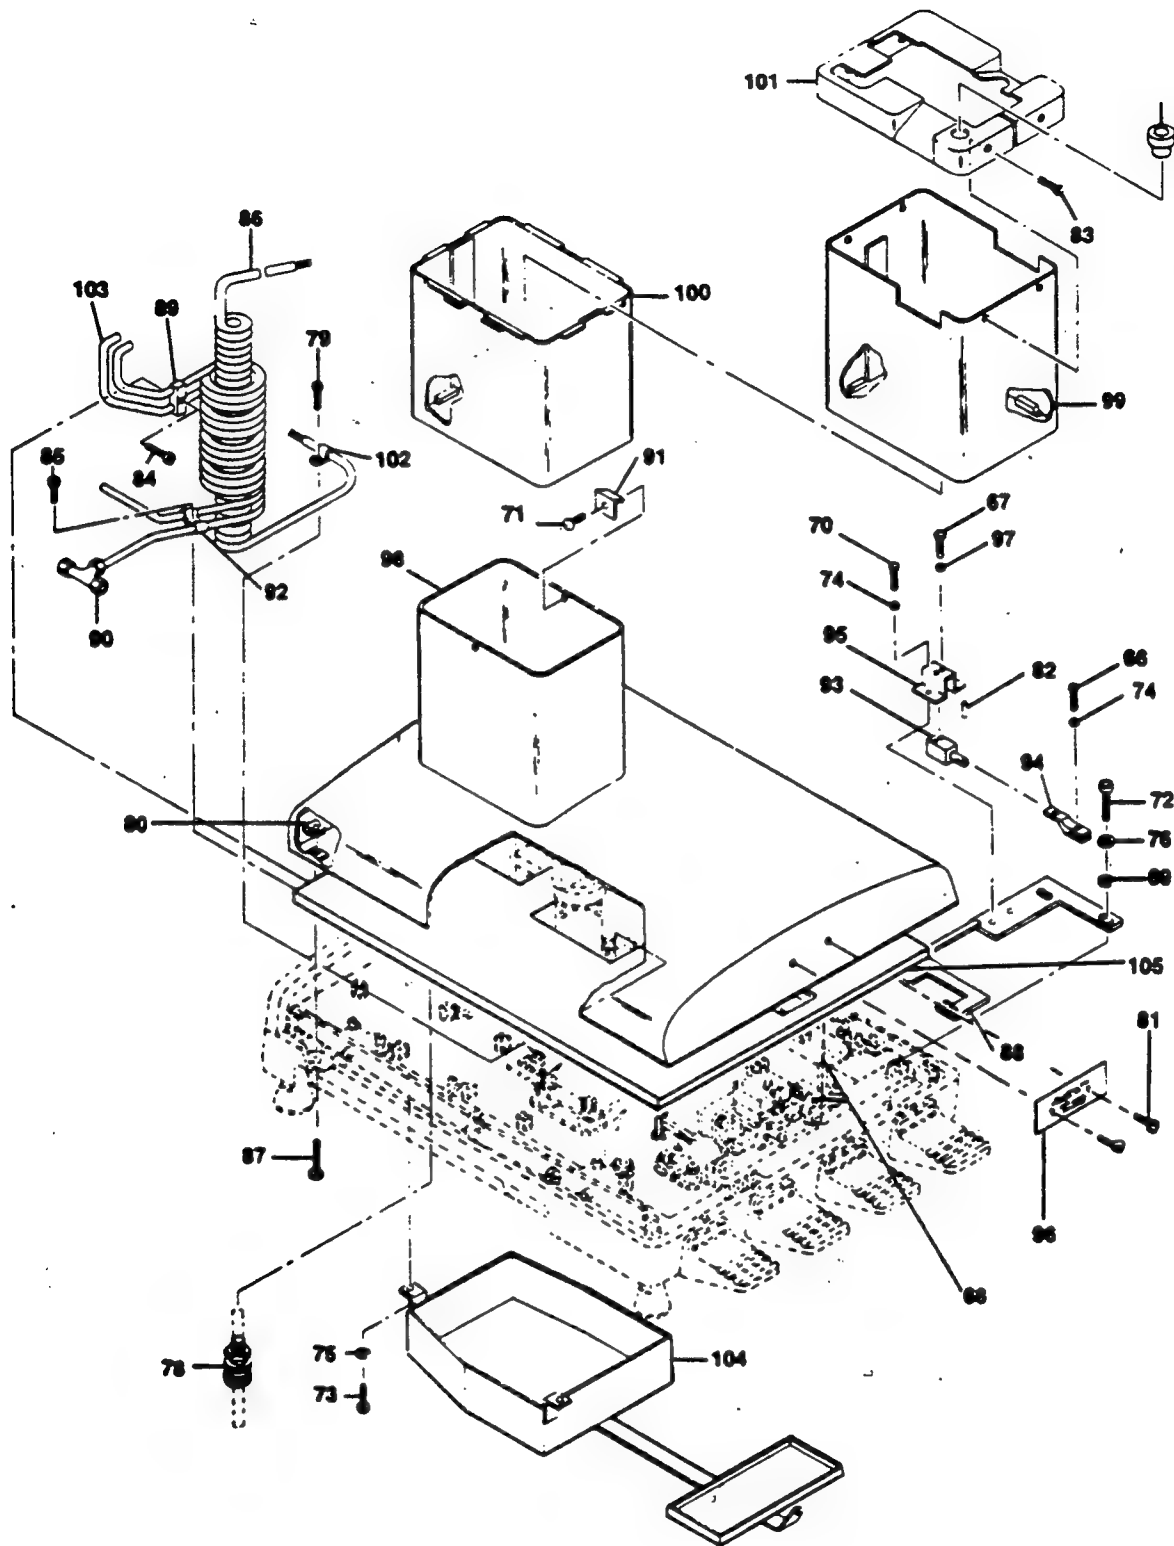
2080RC BASE ASSEMBLY (Sheet 2 of 2)
